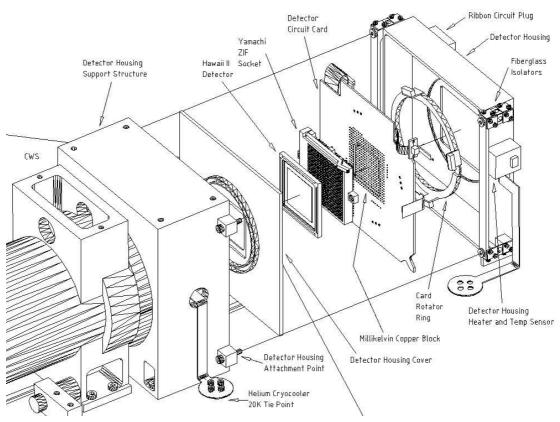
Exploded view of the detector housing showing the detector and associated components.
